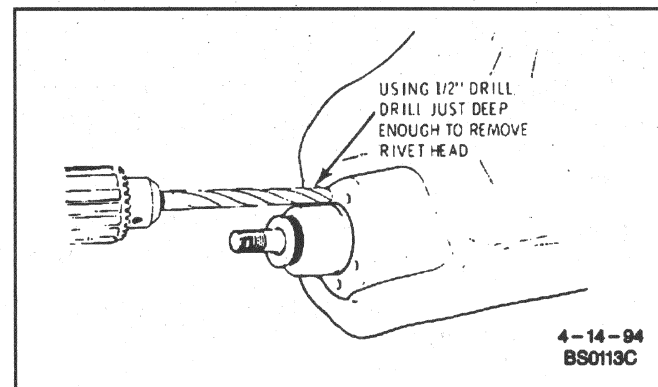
Drilling Front Upper Control Arm Ball Stud Rivet Heads
